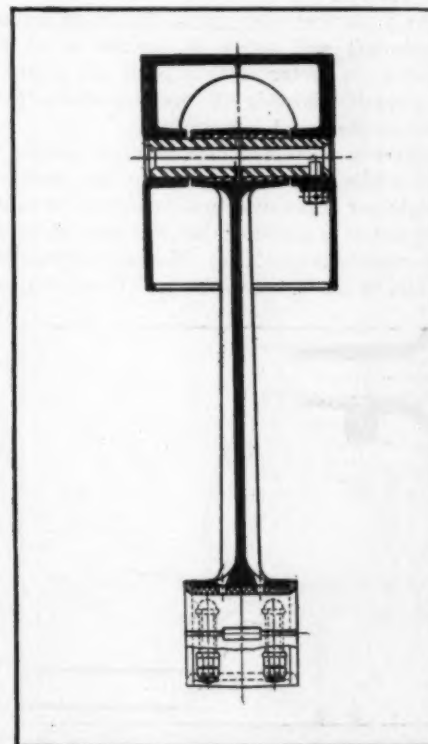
Section of the connecting rod assembly, showing method of fastening gudgeon pin and light construction piston
